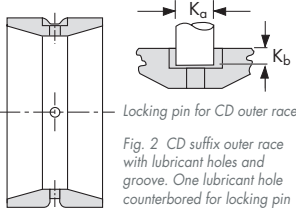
CD suffix outer race with lubricant holes and groove. One lubricant hole counterbored for locking pin
